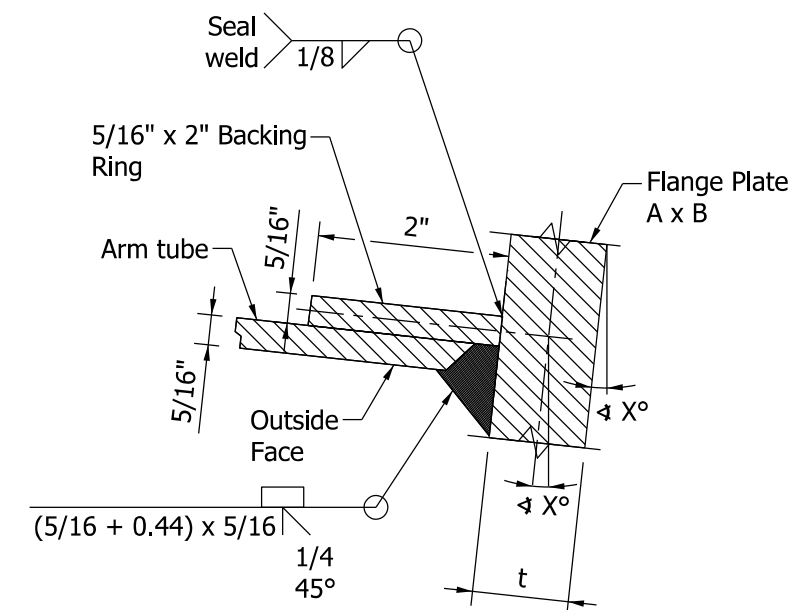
PLATES AND BOLTS FOR SIGNAL SINGLE ARM CANTILEVER
